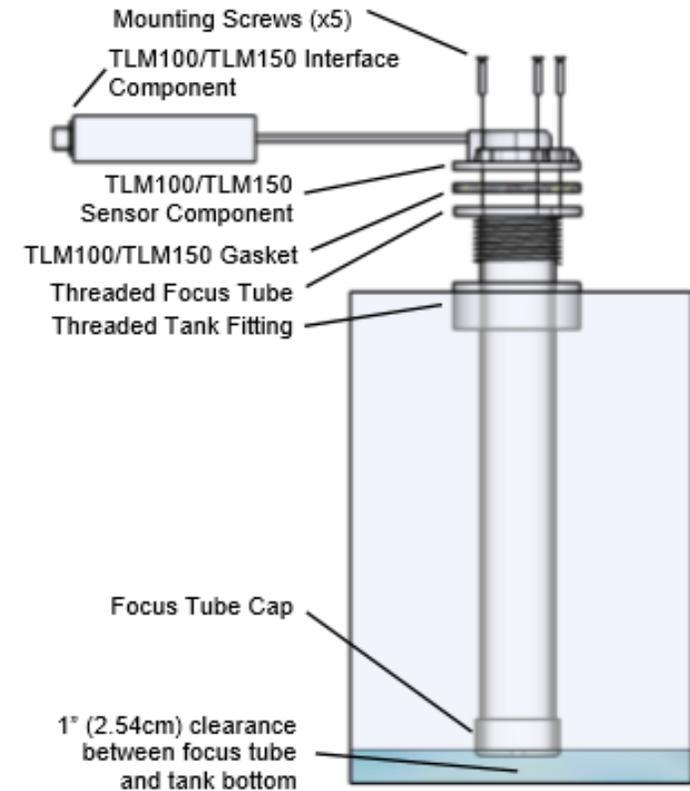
Mounting TLM100/TLM150 and Focus Tube (TFT-1.5NPT or TFT-1.25BSP) on Threaded Tank Fitting
